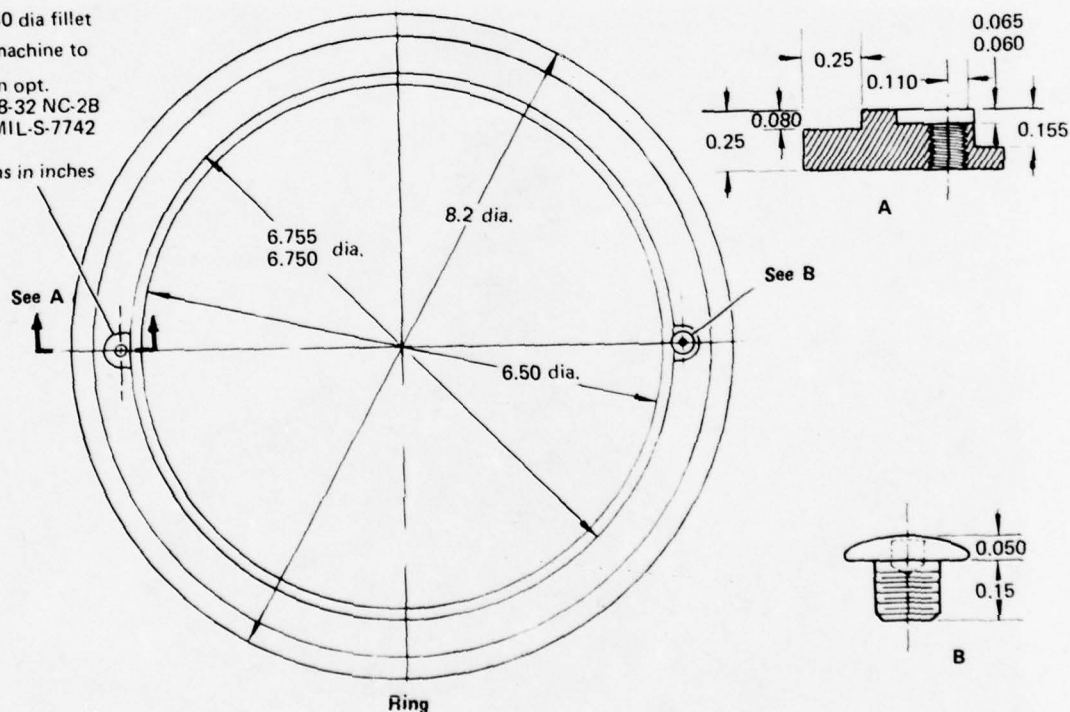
Router Template Assembly Components—Support Ring and Lock Screw
